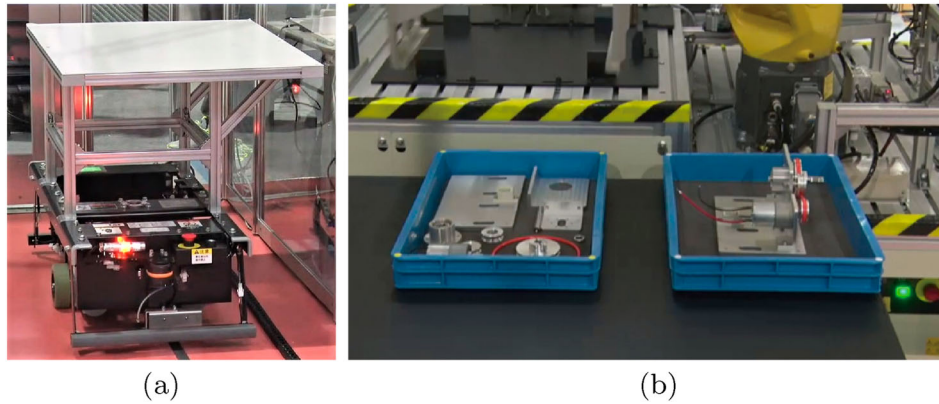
Bringing in the parts and carrying out the assembled product by the AGV. (a) AGV overview; (b) Bring-in/out of the parts tray.
